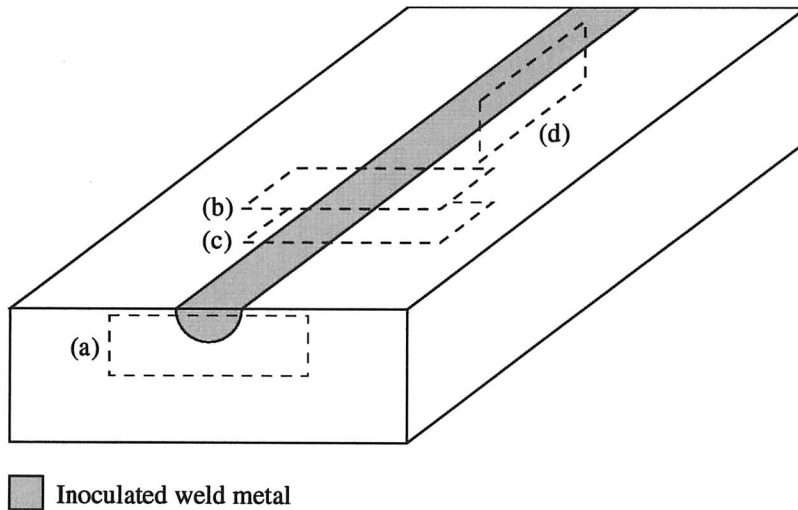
Sections cut for optical microscopy. (a) Transverse profile, (b) plan view 100 μm below weld surface, (c) plan view 1 mm below weld surface and (d) section along the weld centreline.
